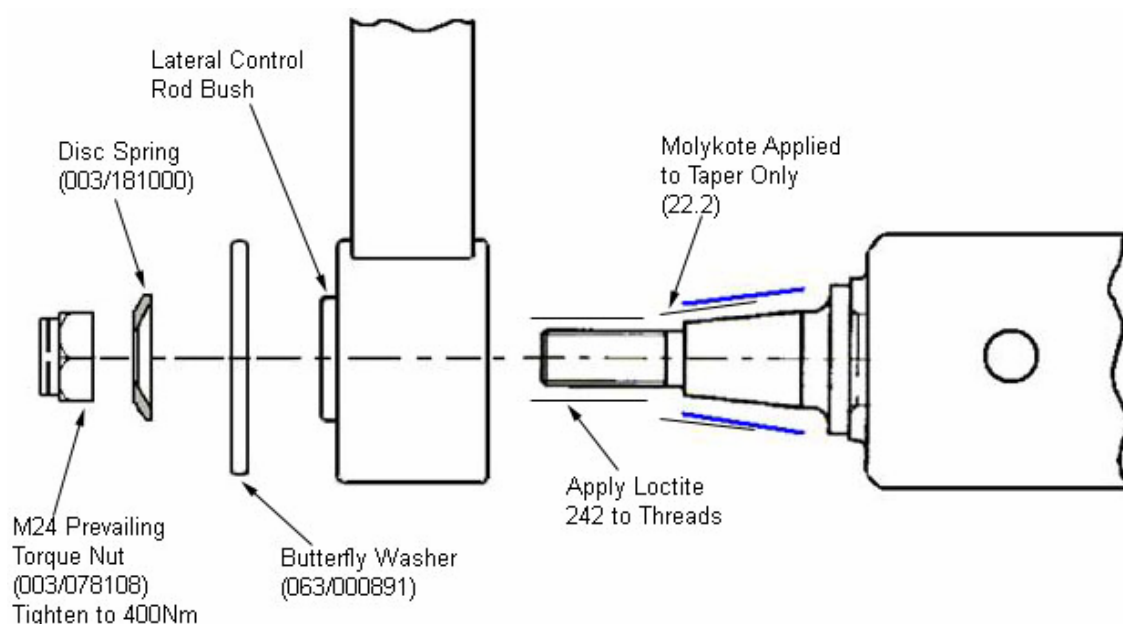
Exploded View of Assembly of LCR onto Frame Spigot
